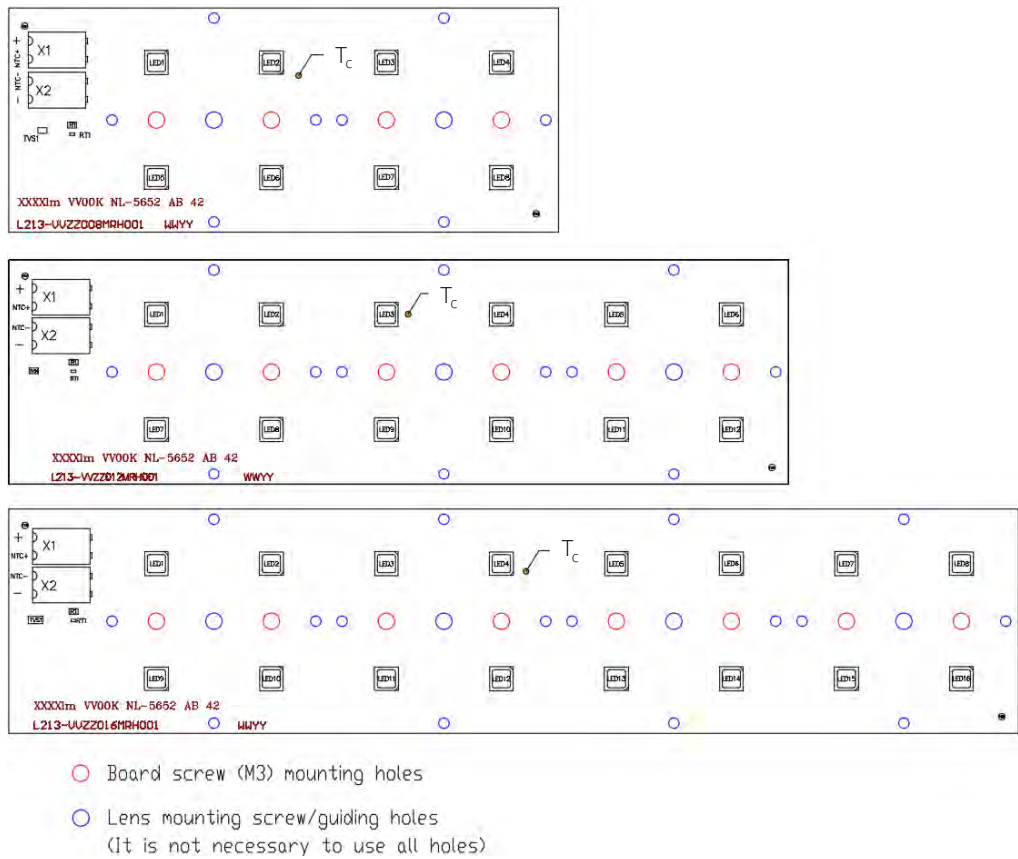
$T_c$  locations, board and lens mounting screw/guiding holes for all LUXEON XR-5050 SQR configurations.
